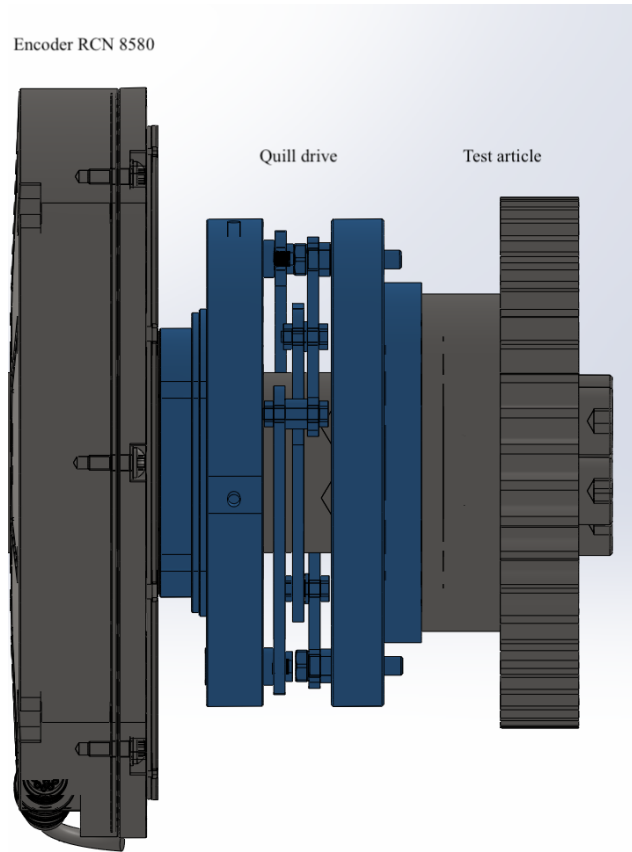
Detail of the quill drive mechanism as designed for the test bench
